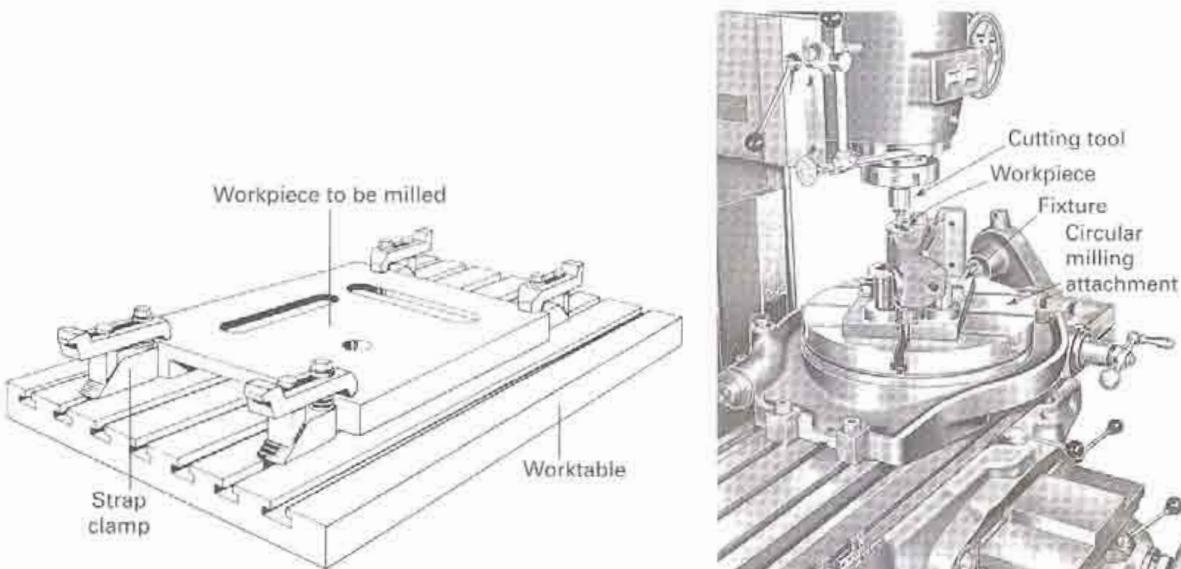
While the work can be clamped directly to the milling machines table (on the left), the workpiece on the right is located in a fixture mounted in a circular attachment located on the table, so a circular slot can be milled in the workpiece.
